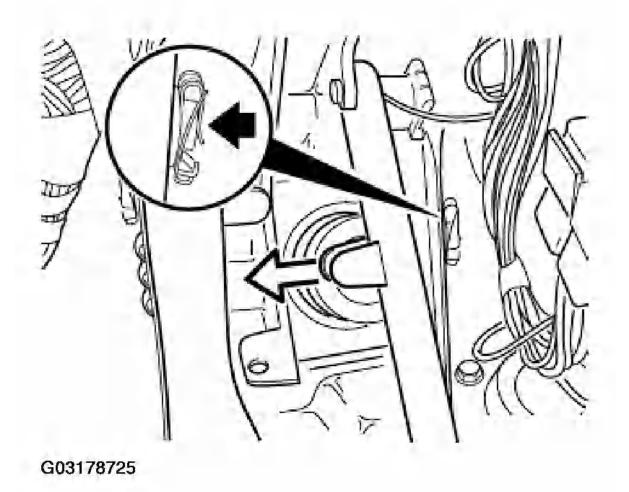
Removing Locking Clip For Shaft Pin Of Brake Pedal Courtesy of BMW OF NORTH AMERICA, INC.
